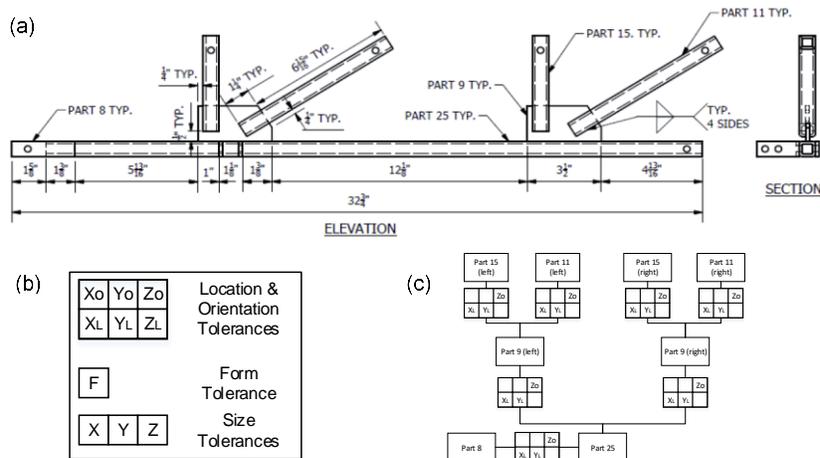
Example of steps involved with creating an assembly diagram for a single structural assembly. (a) A dimensioned drawing for an assembly is broken down into its sub-components using (b) Geometric Dimensioning and Tolerancing notation to create (c) an assembly diagram.
